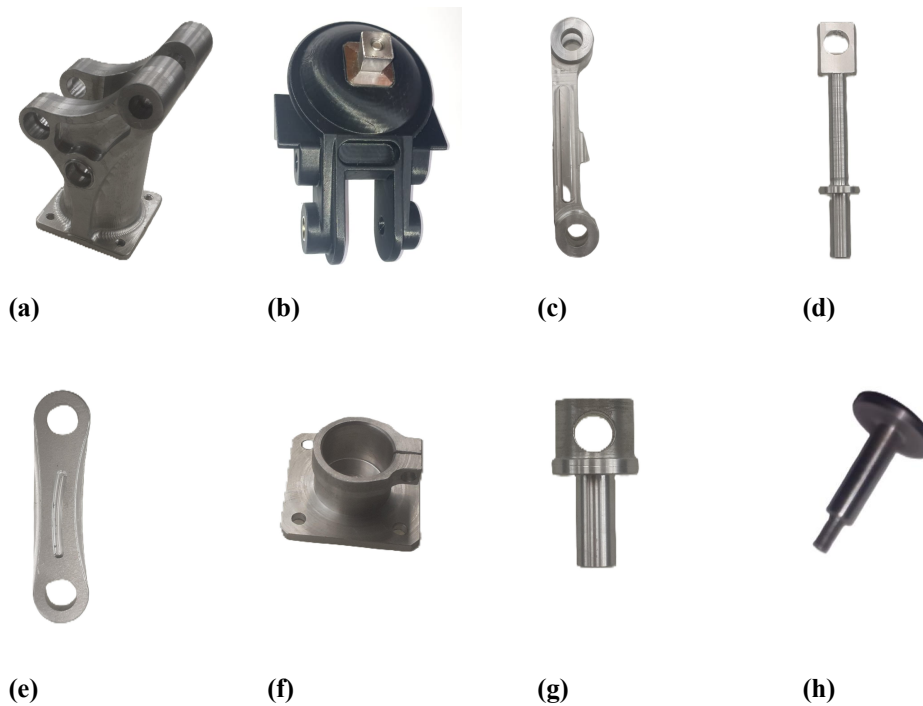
Components machined using multi-axis CNC technology: (a) Lower link or base; (b) Upper link or coupler made using additive manufacturing (black) and the element for attaching it to the socket system (gray); (c) Drive link; (d) Spring guide; (e) Follower link; (f) Element for coupling the knee prototype with the prosthetic tube; (g) Spring base where the guide enters; (h) Adjustment and locking element between the socket and the silicone liner.
